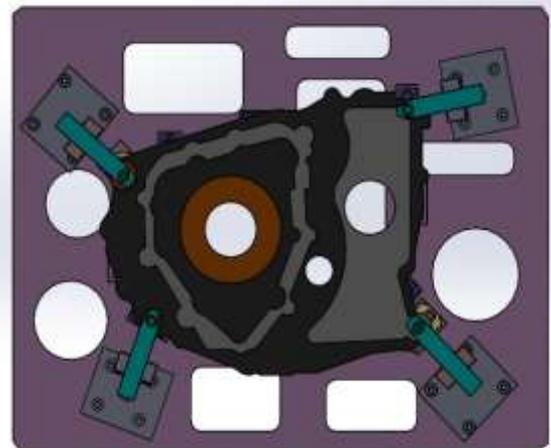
Shows 3D CAD model of Fixture Assembly of Crank Case right
